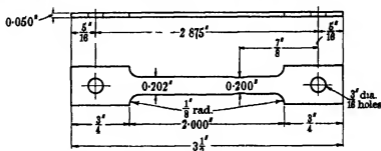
Shape and dimensions of X-ray tensile specimen.
